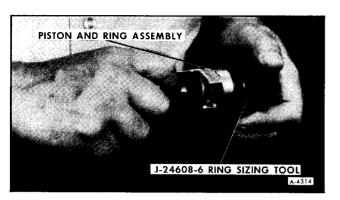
Turning Piston and Ring Assembly into Ring Sizing Tool
